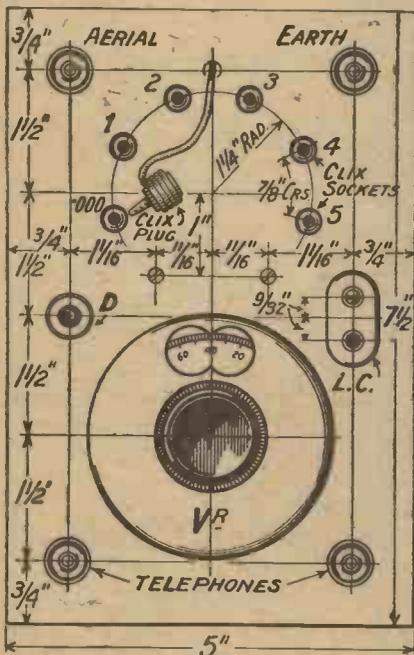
All drilling centres may be obtained from this drawing. Blueprint No. C.1055A.
